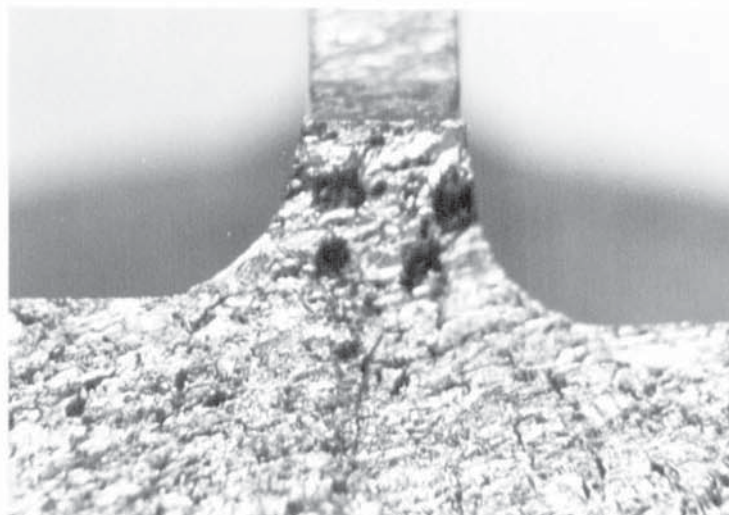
Cause of Failure of Front-Face Crack Specimen.
